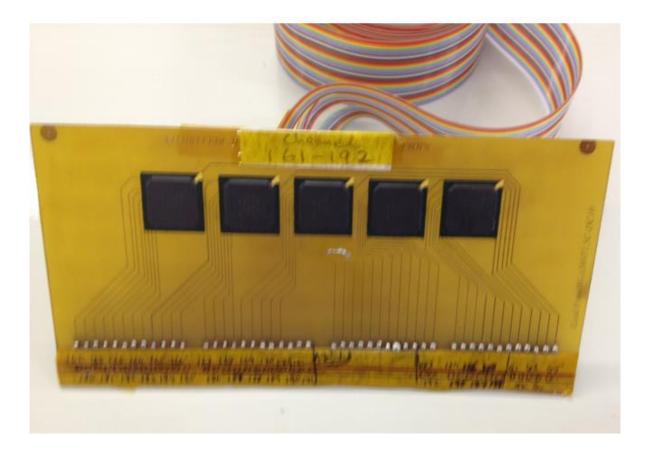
Part of the BGA81 assembly technology used for the investigation trial
